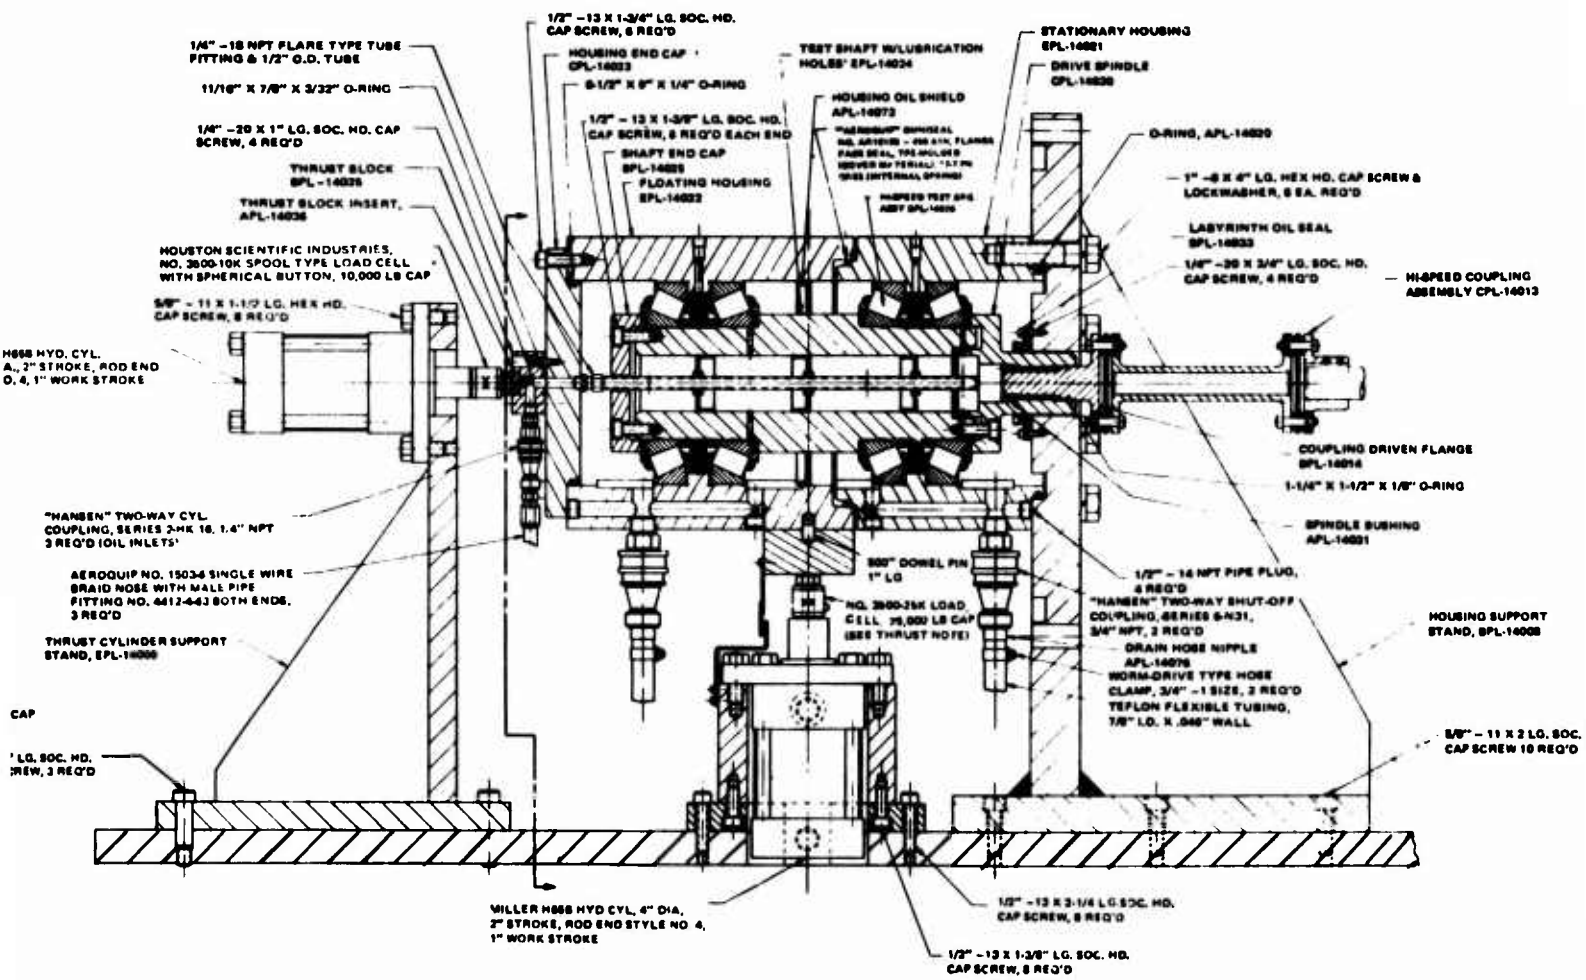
shows bearing mounting, and loading and lubrication systems. The bearing mounting arrangement simulates the mounting arrangement in the HLH combining transmission input bevel pinion gear.
